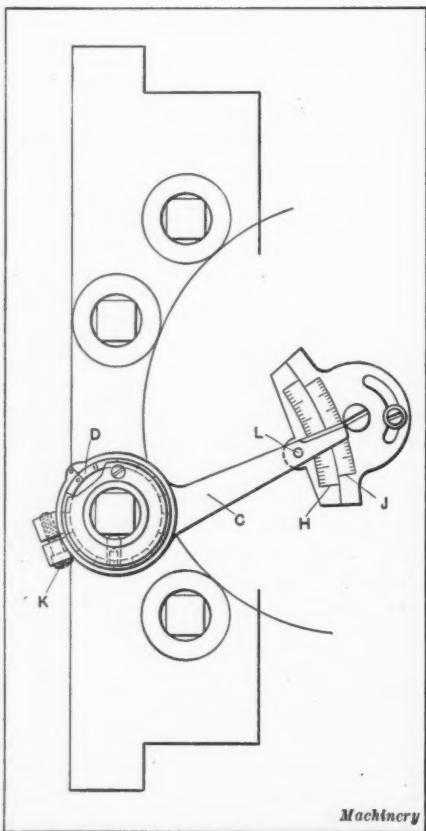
Assembly View of Auxiliary Feed-screw Dial
